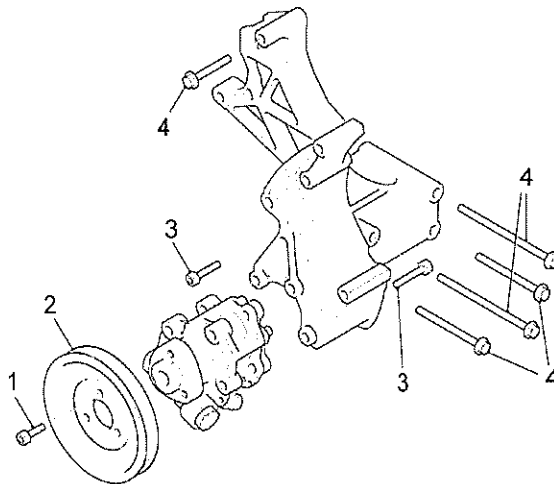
Steering pump (5-cylinder Euro 3 engine variant)
